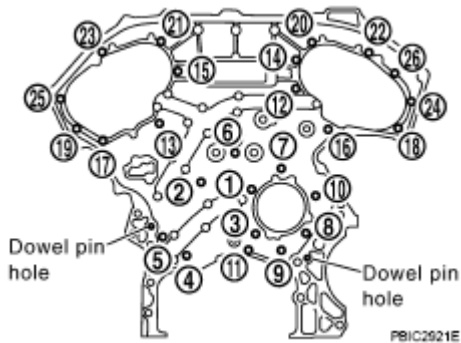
Identifying Rear Timing Chain Case Bolts Sequence
